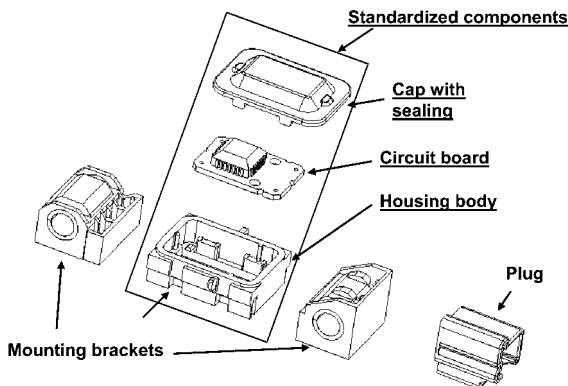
Modular approach to constructing a sensor housing from standardized components and a custom-specific parts
